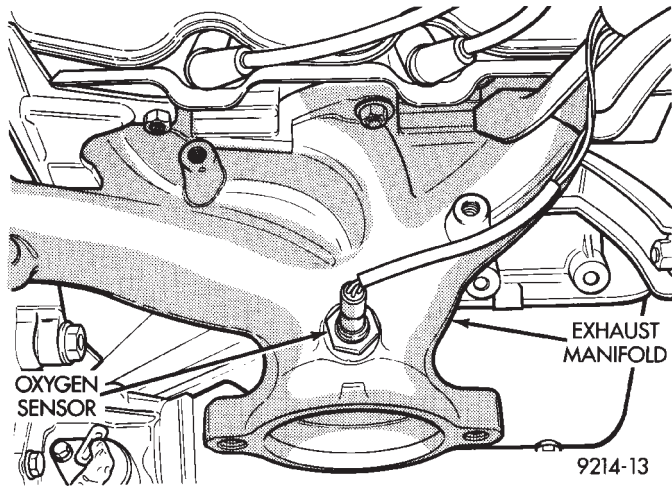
Upstream Heated Oxygen Sensor—3.0L
